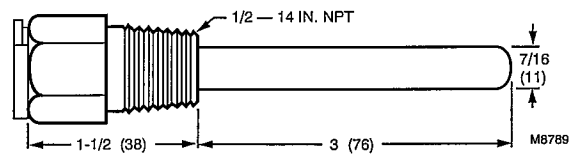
Approximate immersion well dimensions in in. (mm) for all models except L4006C and L6006B.
